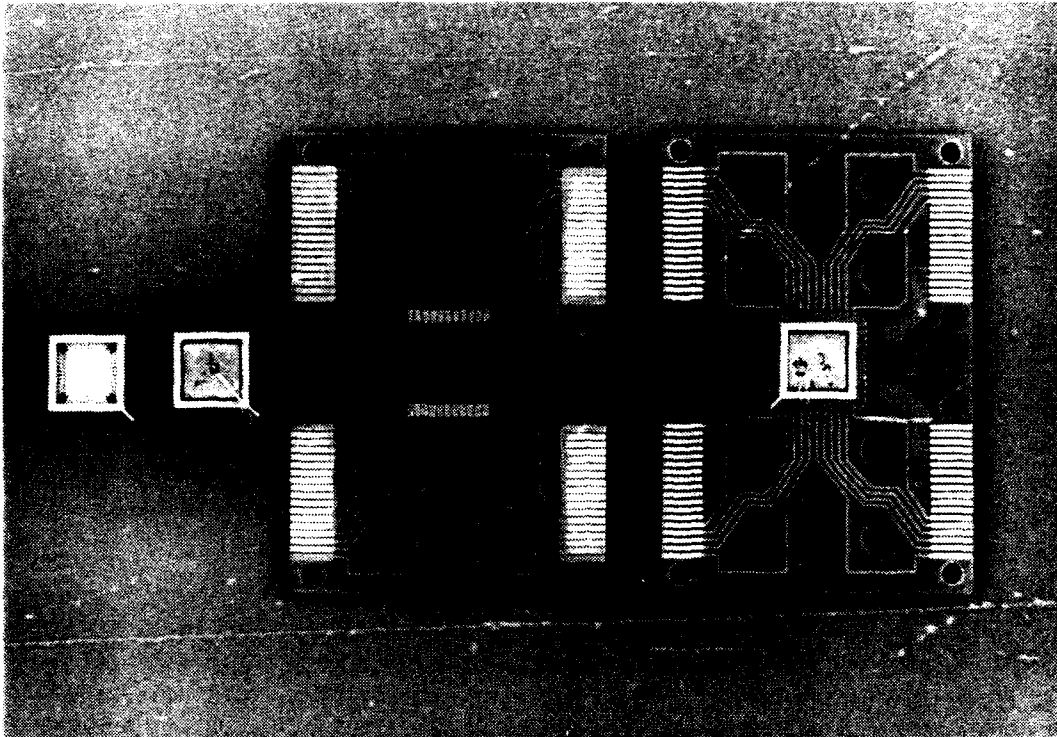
Chip Carrier, PWB and CC/PWB assembly.
